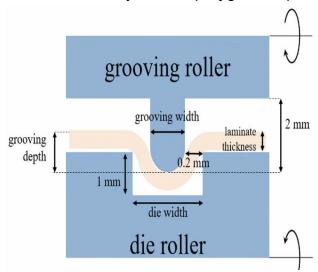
Adjustable grooving module with two gear-coupled rotating shafts [55]
